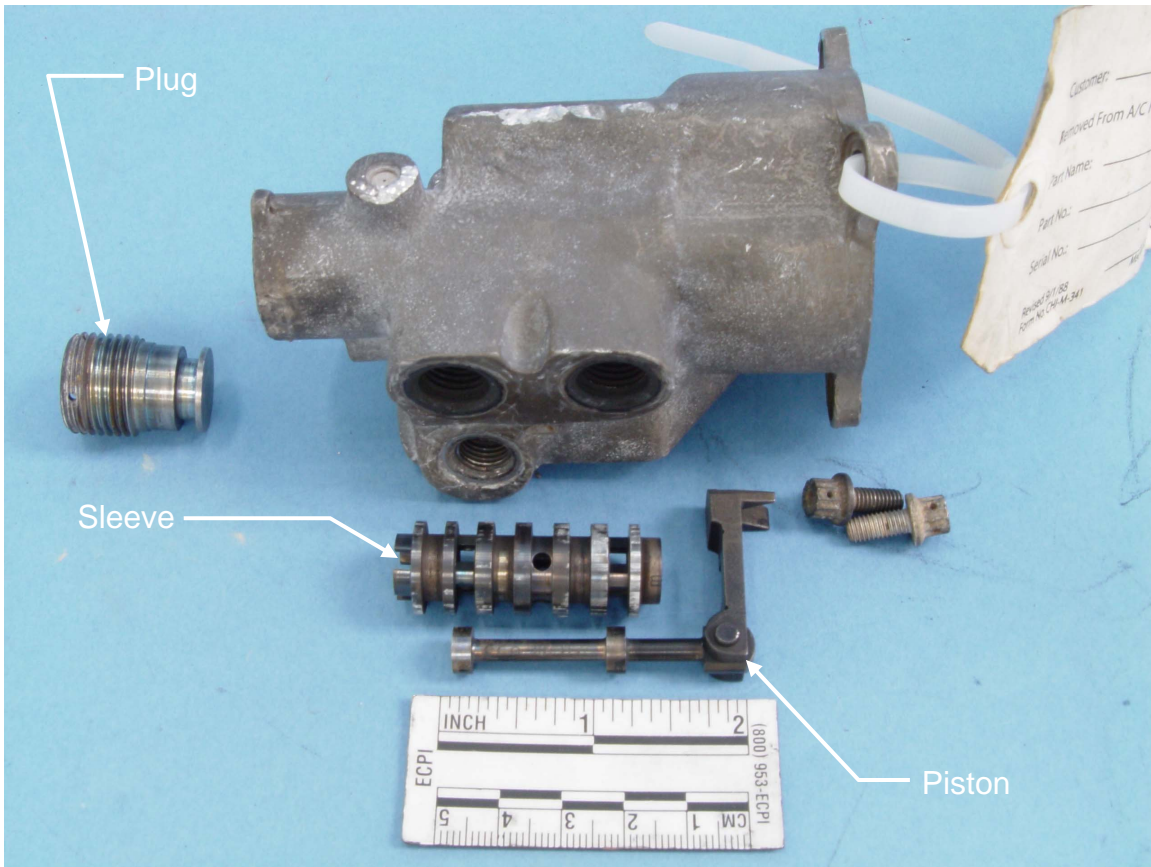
Number 2 engine pilot valve assembly after disassembly.
